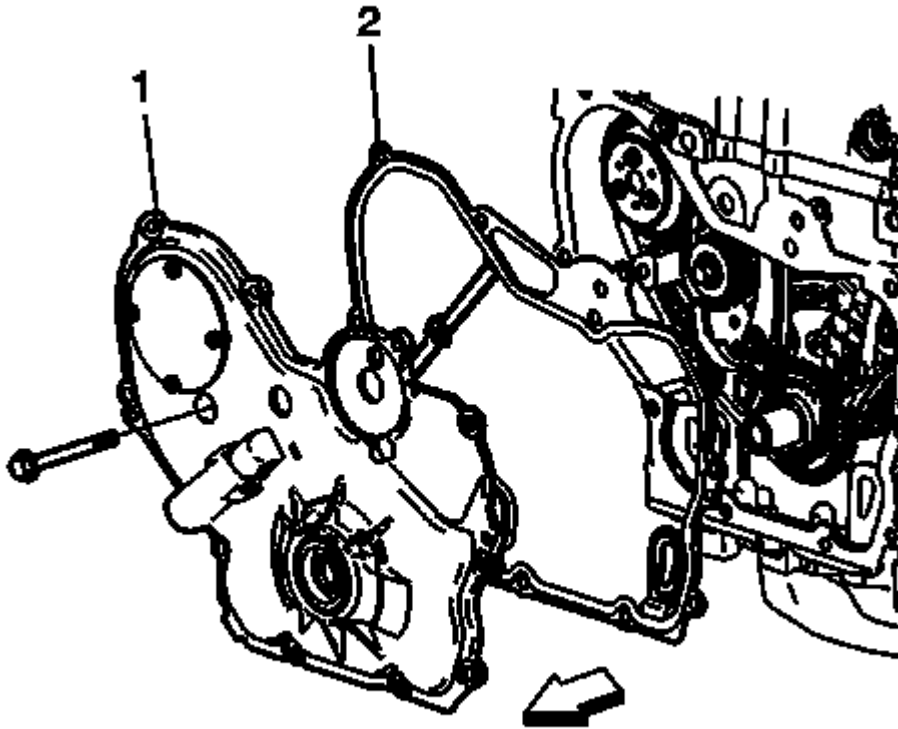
Long Water Pump Bolt And Engine Front Cover
